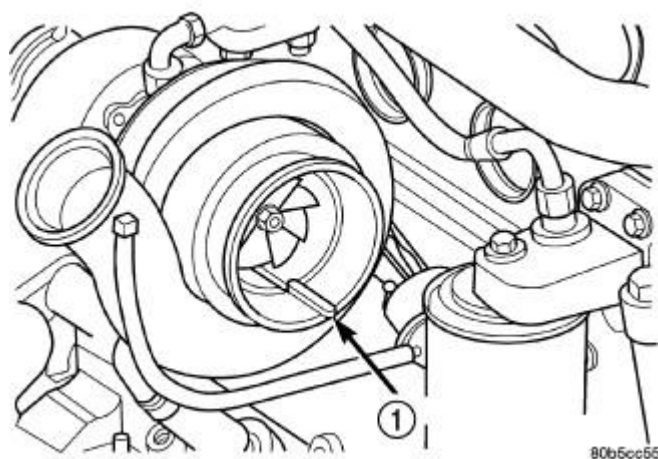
Measure Turbocharger Bearing Radial Clearance
